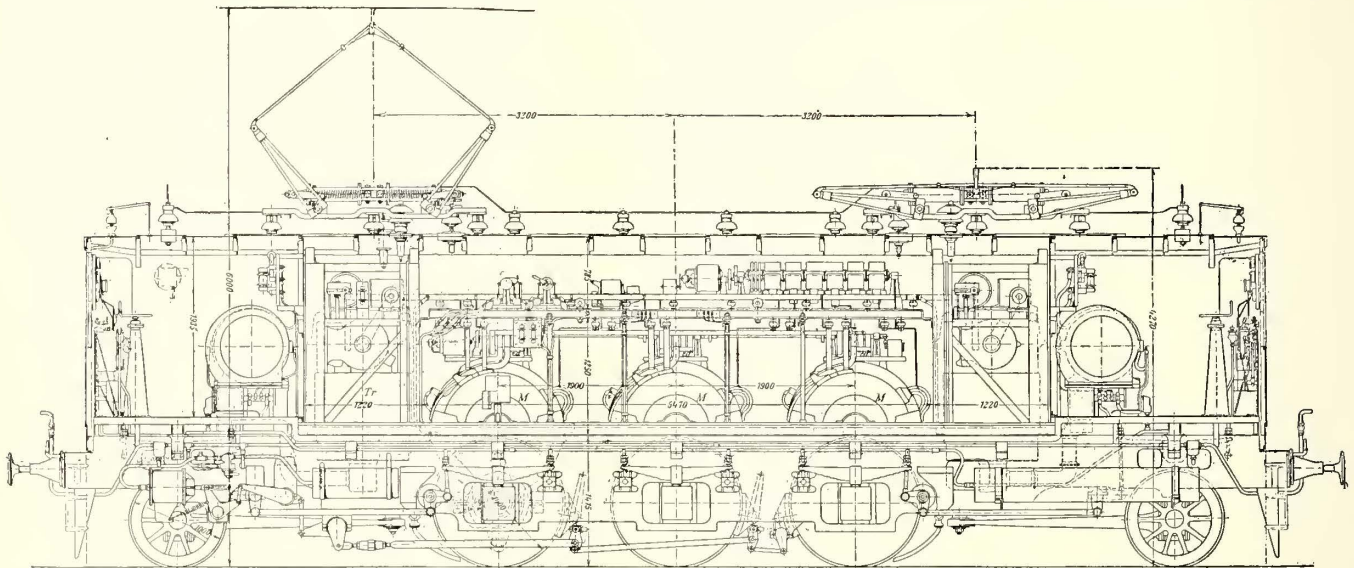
Midi Locomotive—Side Elevation, Showing Arrangement of Electrical Equipment; Dimensions in Millimeters
